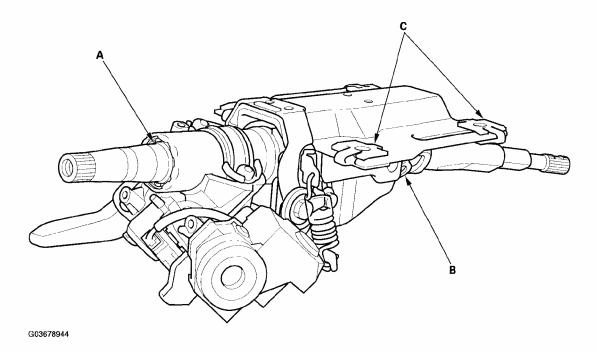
Identifying Steering Column/Tilt Lever Components Courtesy of AMERICAN HONDA MOTOR CO., INC.
